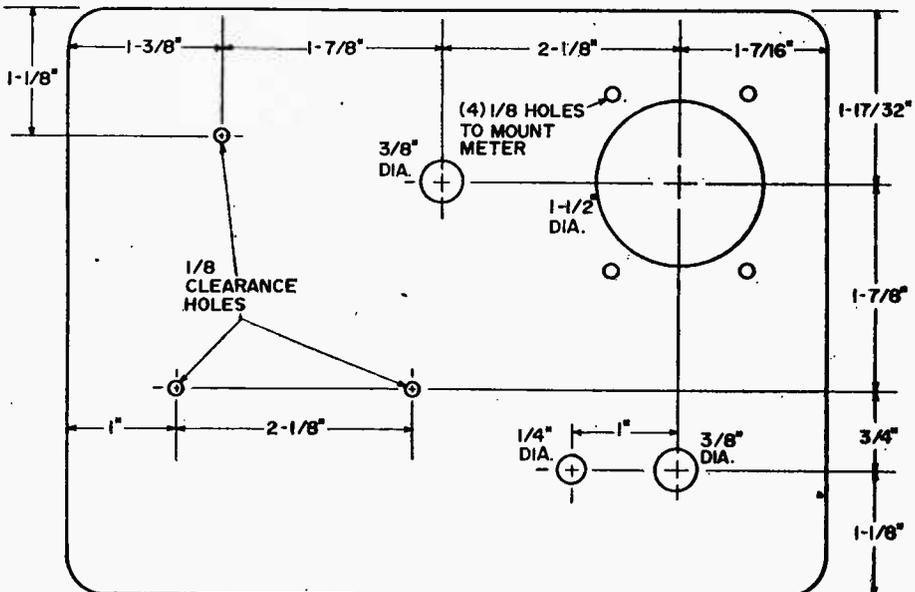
(above) information for drilling the box to house the transmitter circuit card battery and power switch. Card is raised above bottom by extra nuts on mounting bolts. Complete receiver is mounted on its box cover. Drilling details are shown below. Opposite page (center), Fig. 6 details drilling and mounting details for receiver. Note hinged mount for receiver box. This allows receiver loop to be oriented to null the receiver before starting search.
